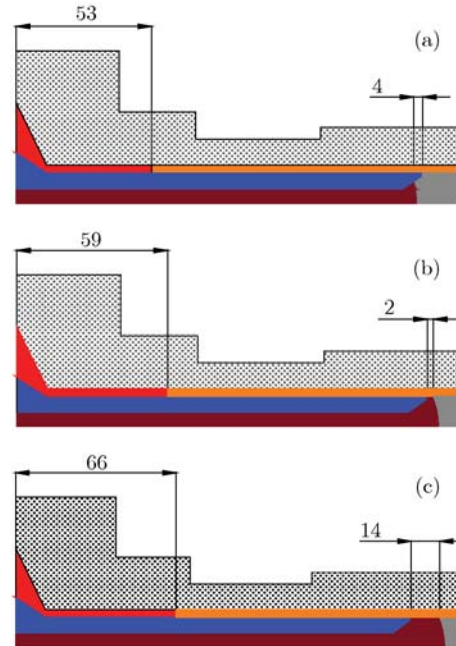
SLI positions of copper and aluminum in the composite mold when casting CCA rods at different mean withdrawing speeds: (a) $v = 60$ mm·min⁻¹; (b) $v = 75$ mm·min⁻¹; (c) $v = 100$ mm·min⁻¹.
